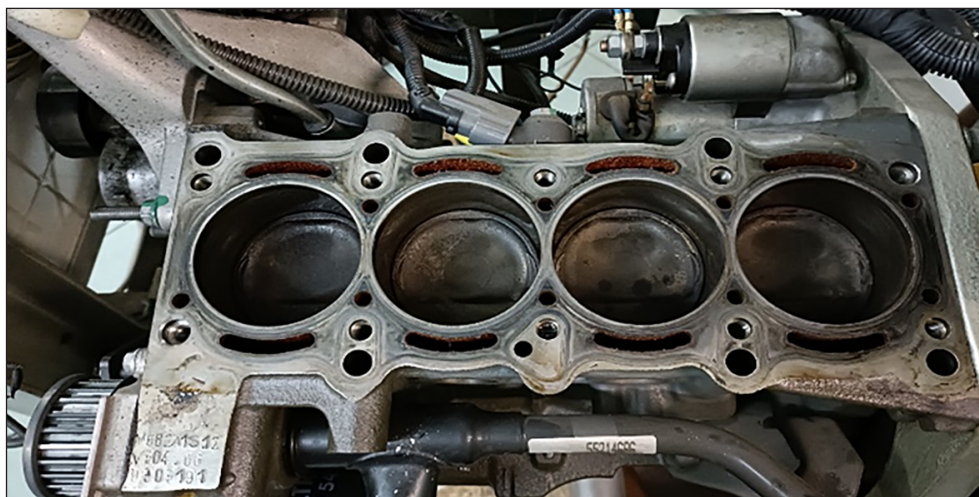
Tested spark ignition engine (during the construction of the test stand – engine without cylinder head)
